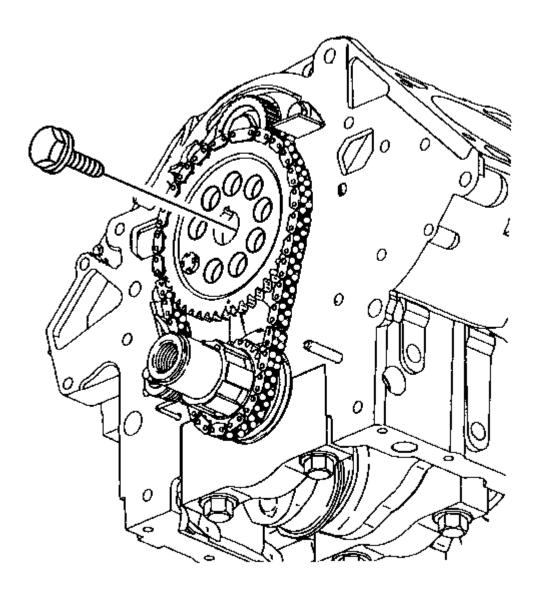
Camshaft Sprocket Bolt Courtesy of GENERAL MOTORS CORP.
